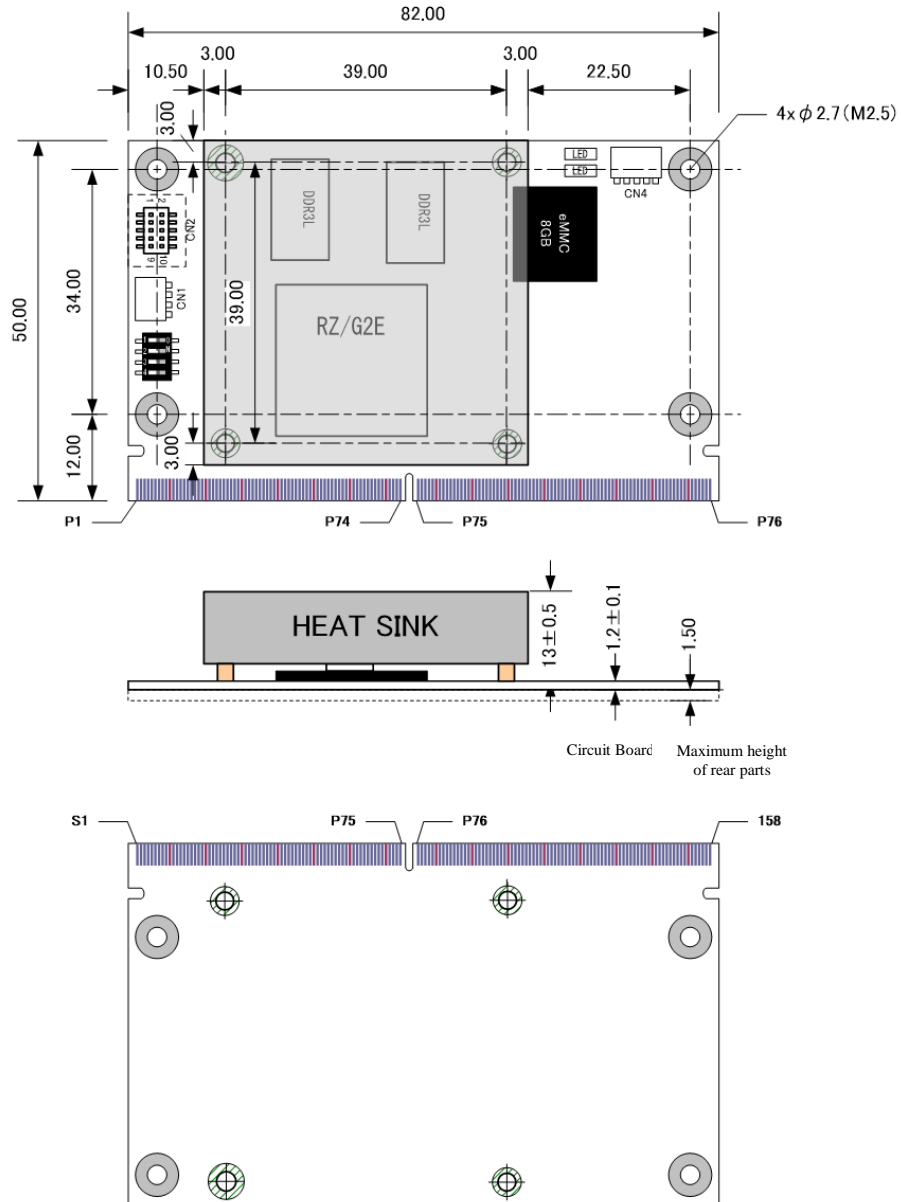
$\alpha$ SMARC-RZ/G2E dimensional drawing
